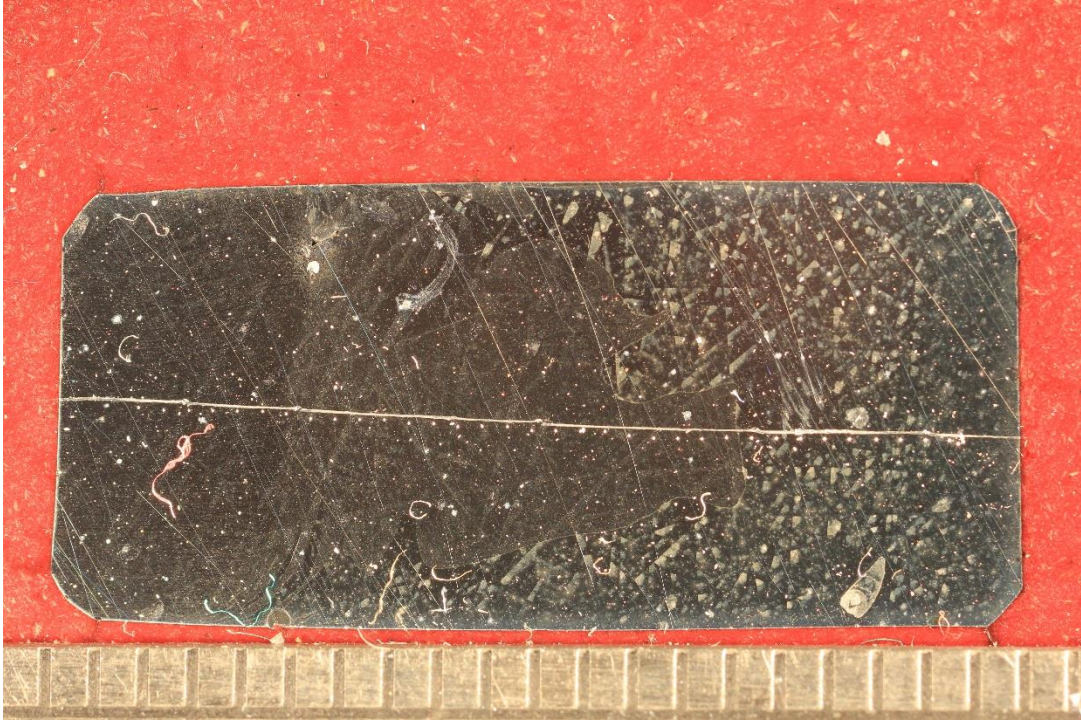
Macrograph of Weld 4 Sample 1
